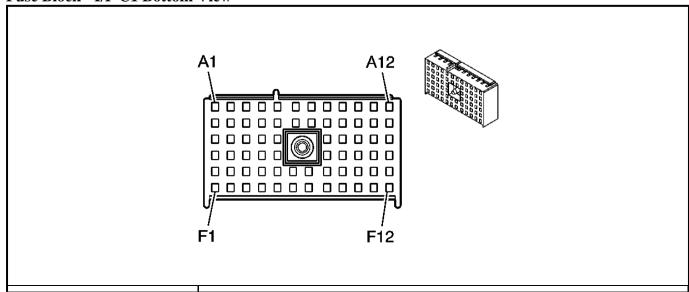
I/P Fuse Block Bottom View Courtesy of GENERAL MOTORS CORP.
